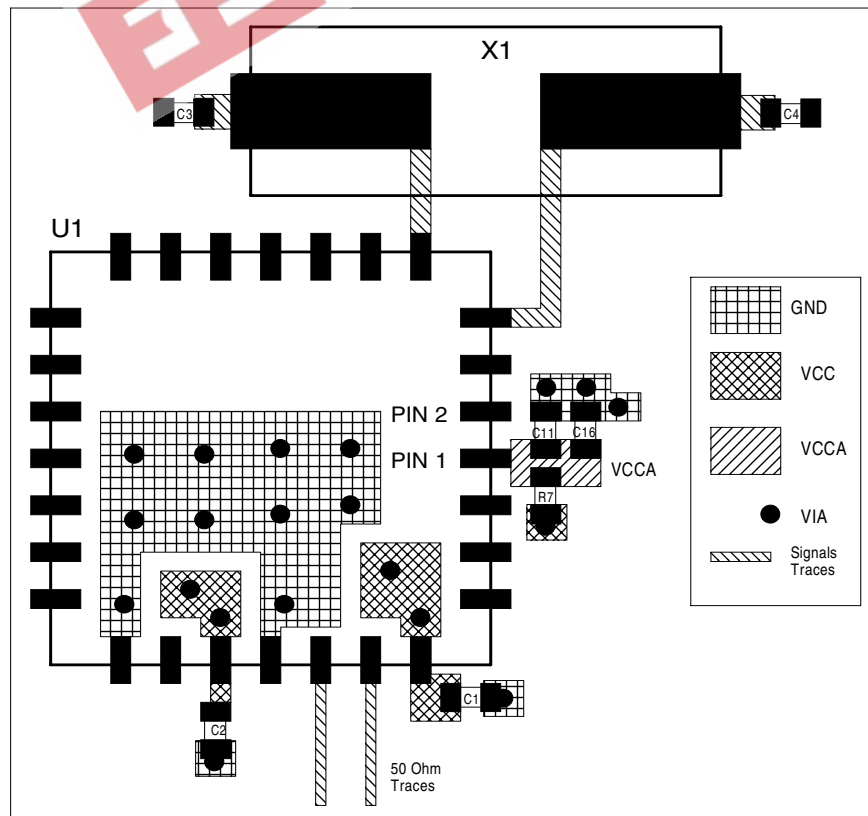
B. PCB BOARD LAYOUT FOR ICS84329B 28 LEAD PLCC
